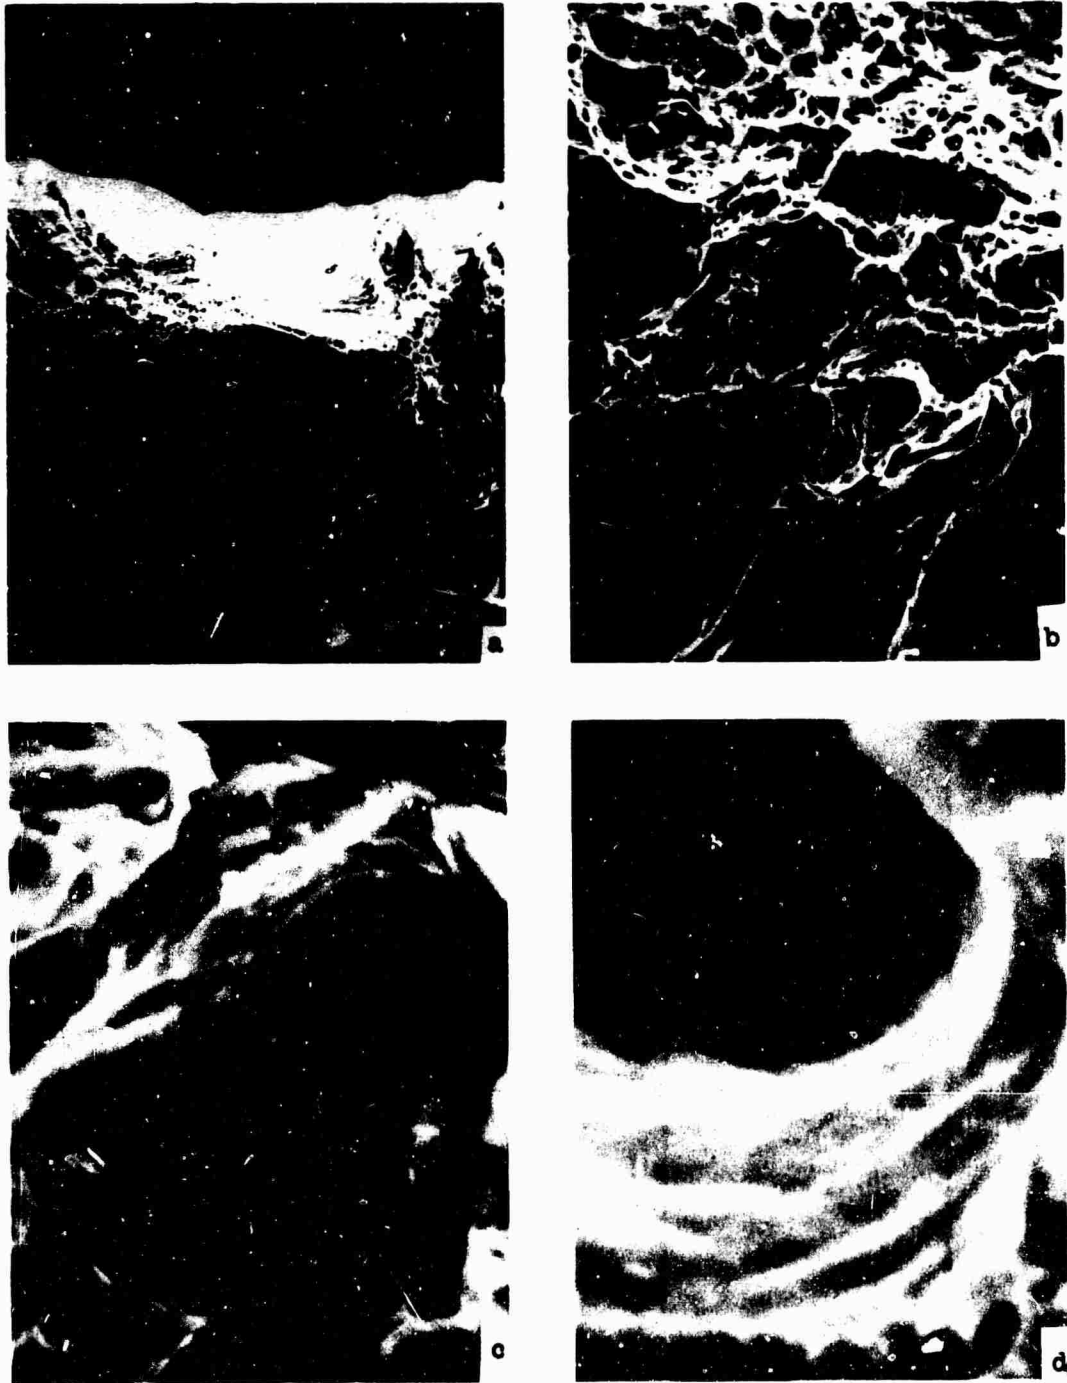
Fracture surface of Fe-0.05%Si chill casting 1/4 inch gage length test bar.
